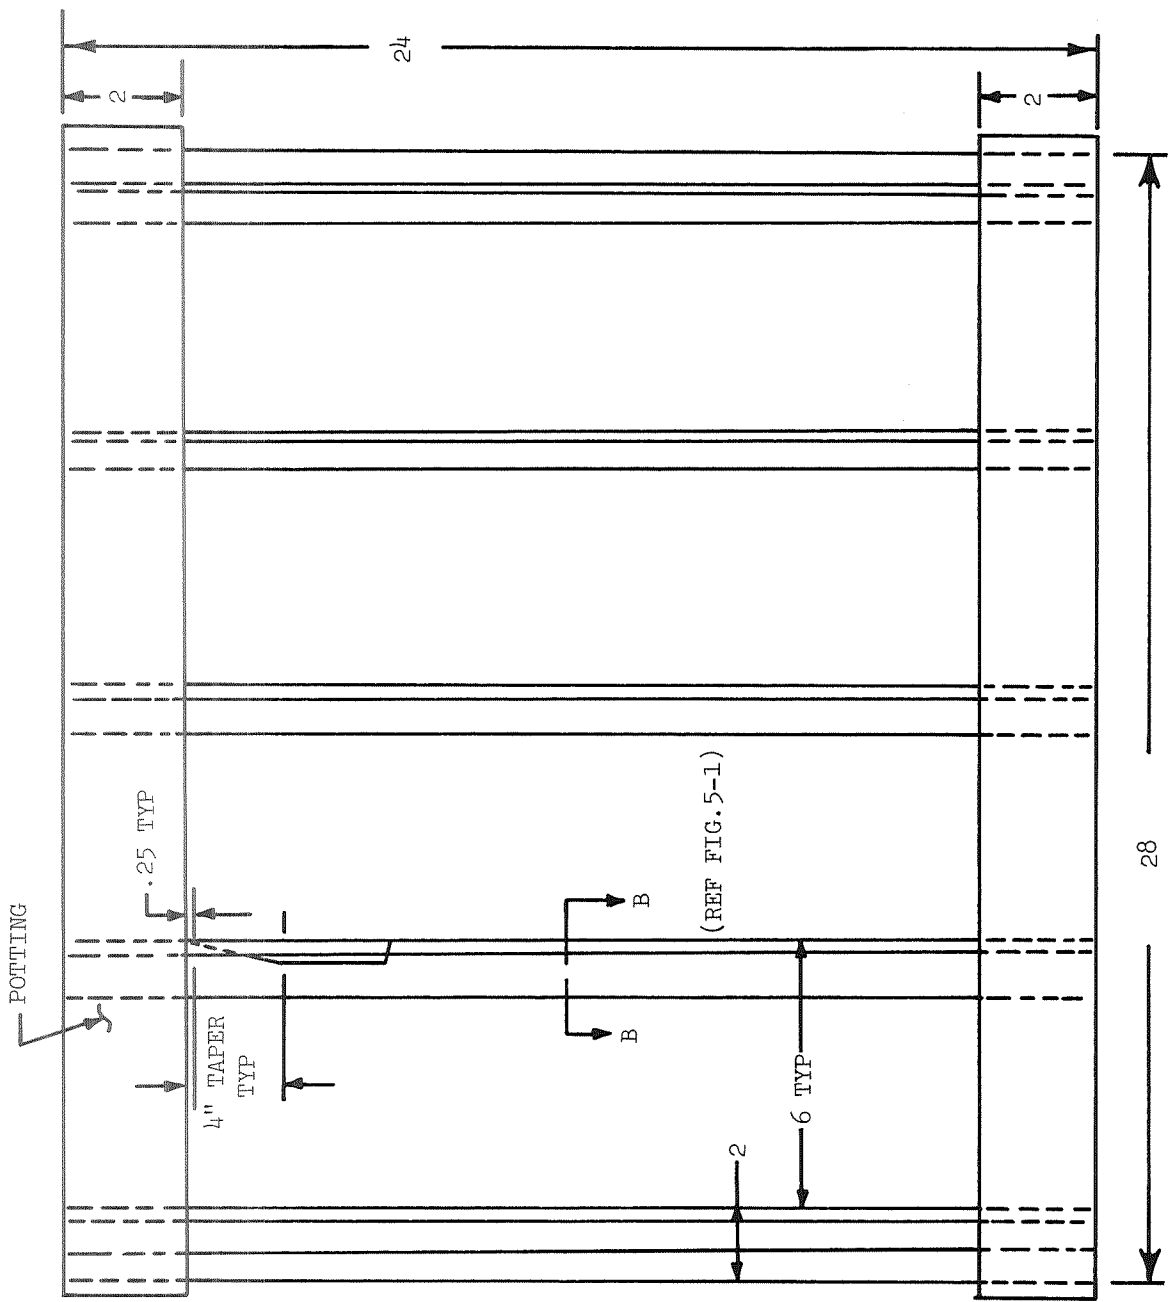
COMPRESSION TEST SPECIMEN GEOMETRY.
